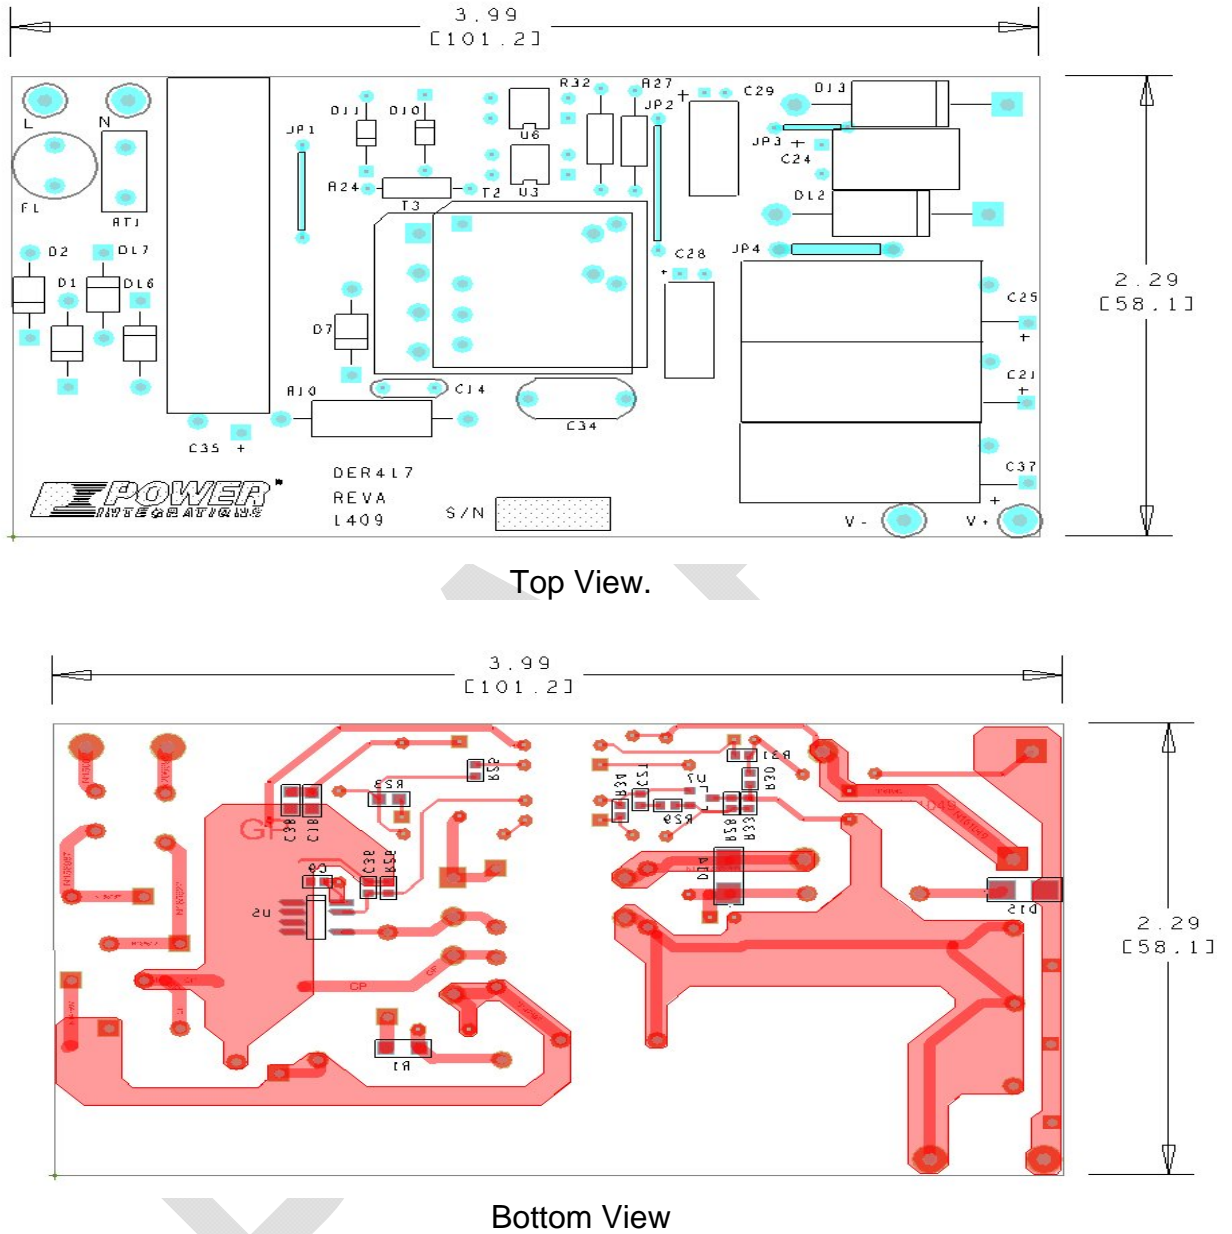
Printed Circuit Board Layout (Dimensions in Inches).
